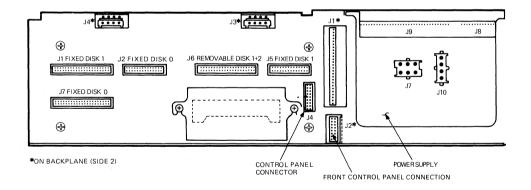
Backplane Assembly (Front View from Control Panel Side)
